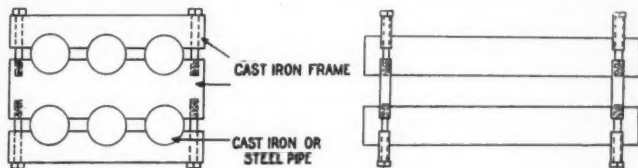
Cylindrical Carburizing Pots clamped in a cast iron frame.
